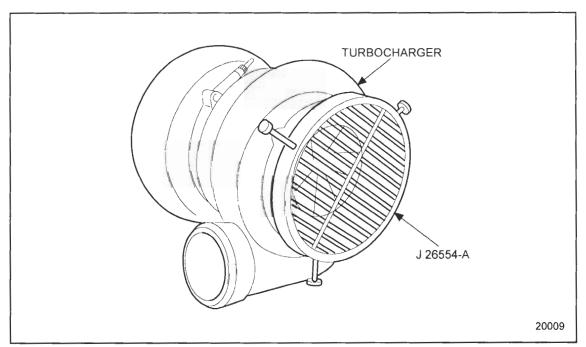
Turbocharger Compressor Inlet Shield, J 26554–A
